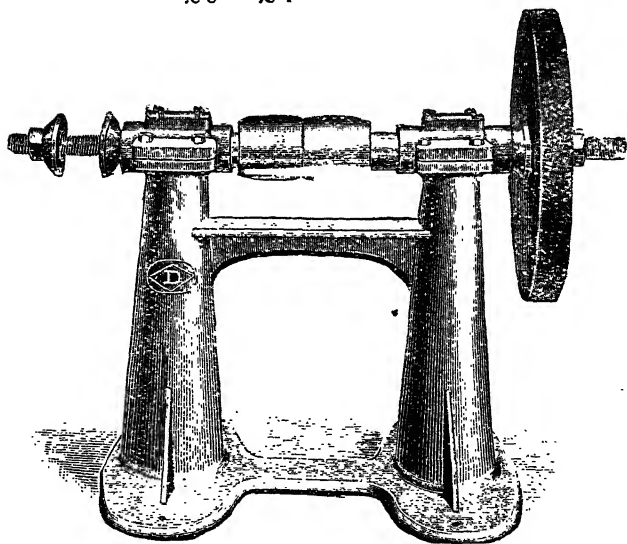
HEAVY GRINDING AND POLISHING LATHE.
